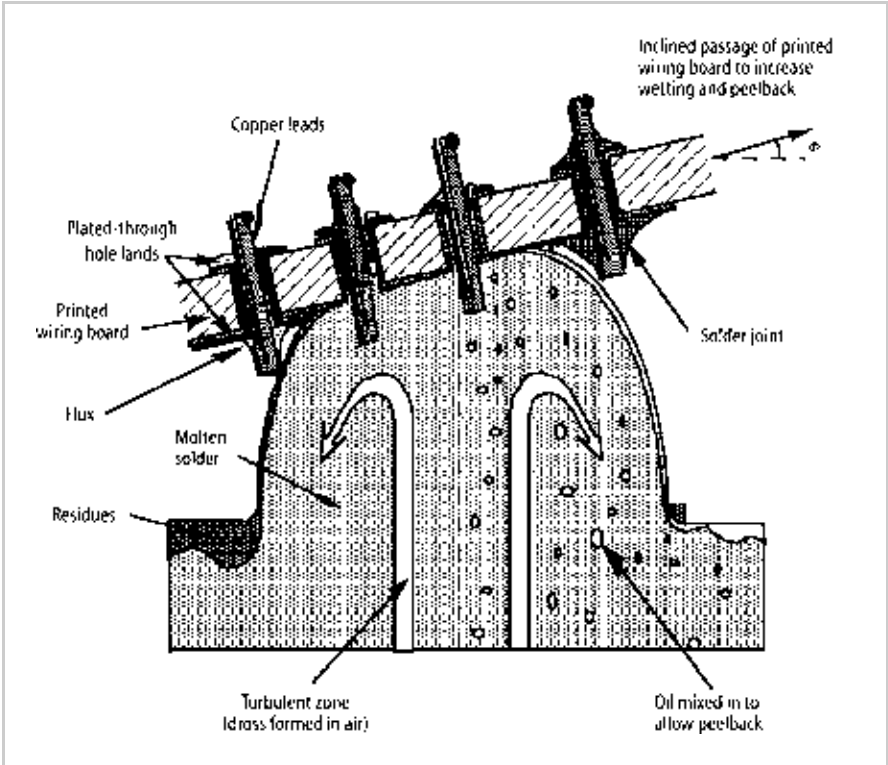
Diagram of wave soldering showing wave elements and board contact. (Reproduced from Malhotra, A., “Wave Soldering and Reflow Soldering” in *Soldering Processes and Equipment*, M. Pecht (ed.), copyright John Wiley and Sons, NY (1993). With permission of the publisher.)
